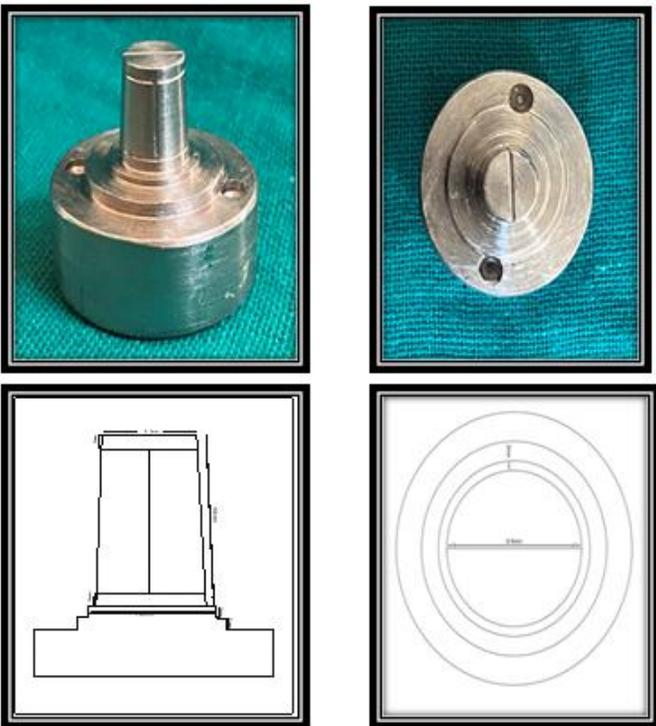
Stainless steel die, 2b Stainless steel die with dimensions (frontal and top view)
